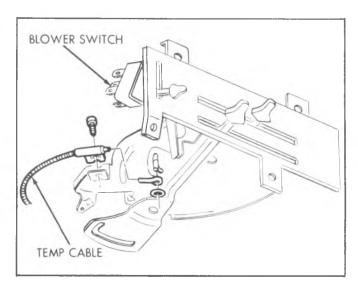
B-41--Control Assembly (C-K Four-Season System)
